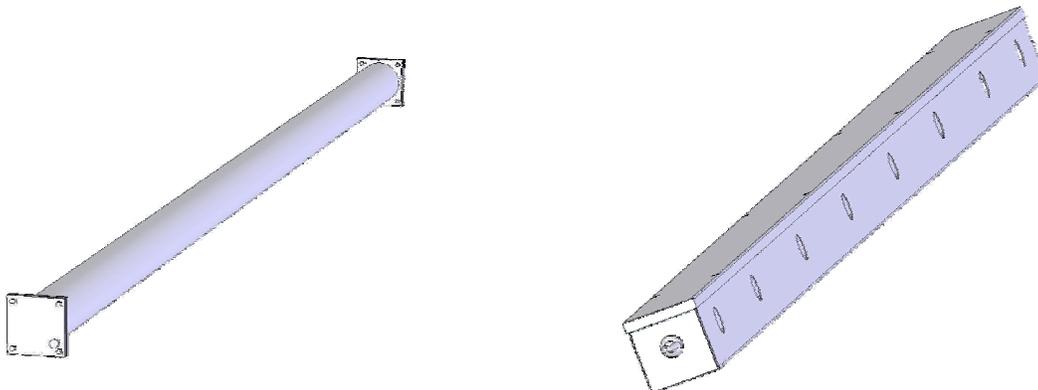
Rod Pipe (left) and Rod Box (right)
